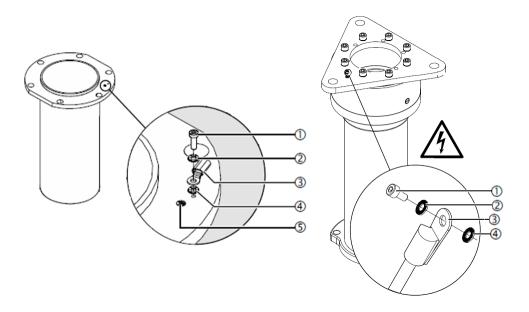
Mounting of the earthing cable on the drop tube for ARES ROTATION arms and ARES ROTATION
